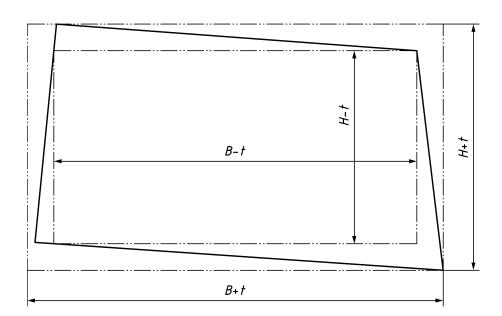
Tolerance limits for dimensions of rectangular panes
